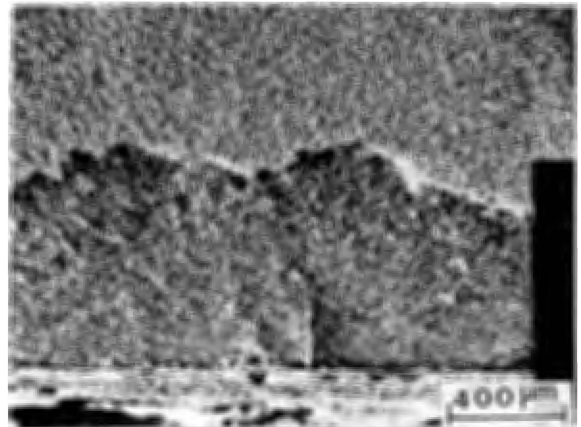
Fractograph showing fretting oxide film formed on the fracture surface near origin of SNCM439 steel. Fracture surface was obtained by open the crack shown in Fig. 13
